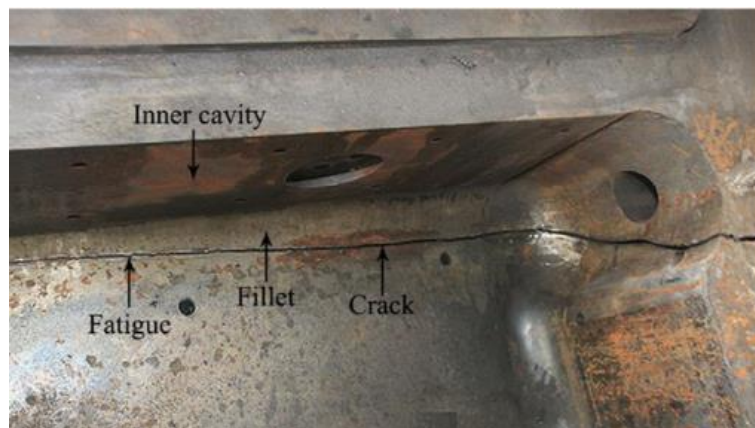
Major mold crack (Hongxun *et al.*, 2016).
